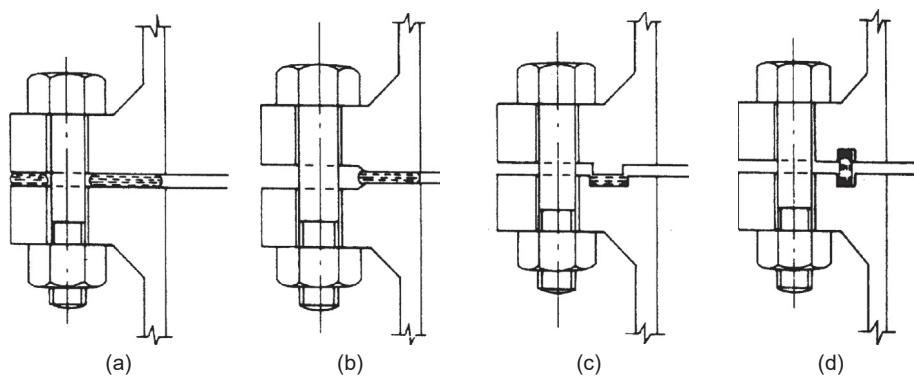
Flange types and faces. (a) Full face. (b) Gasket within bolt circle. (c) Spigot and socket. (d) Ring-type joint.
